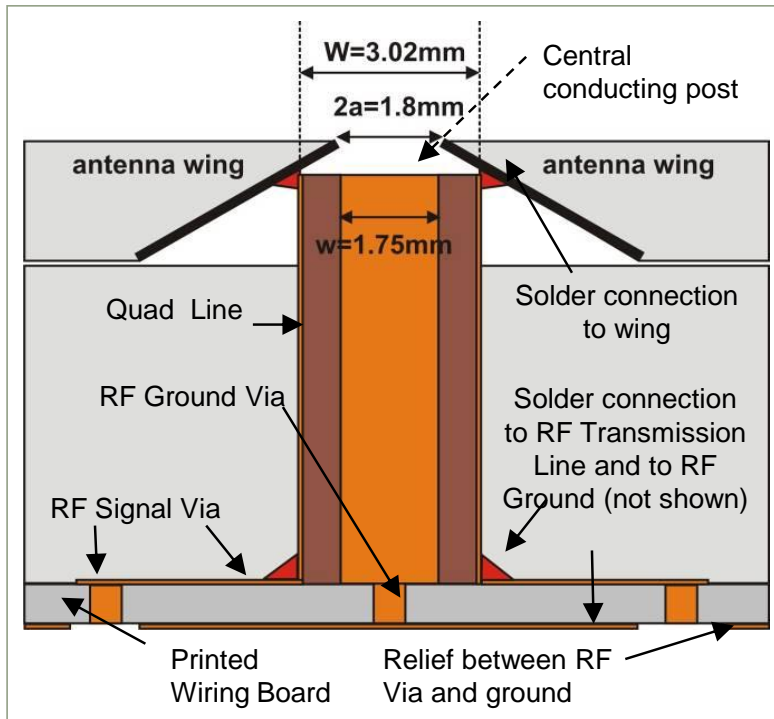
Bowtie wing to quad line to printed wiring board assembly
